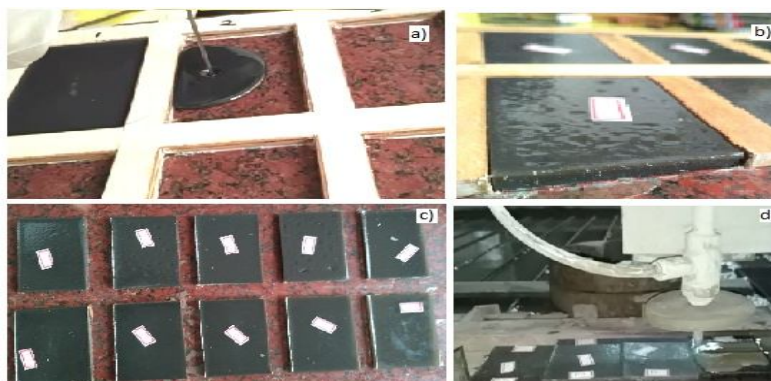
a) Pouring Mixture into cavity b)removing prepared samples c)Samples d)Waterjet cutting for required dimensions.
